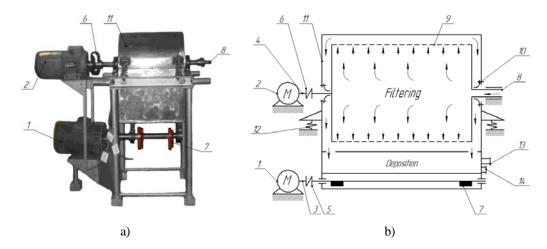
Construction a) and the basic scheme b) vibrocentric machine for raw glycerin purification: 1, 2 – electric motors; 3, 4 – drive shafts; 5, 6 – couplings; 7 – balancers; 8 – hollow shaft; 9 – perforated drum; 10 – elastic spring elements; 11 – container; 12 – elastic elements; 13, 14 – pipes for the discharge of purified raw materials; 15 – separator
